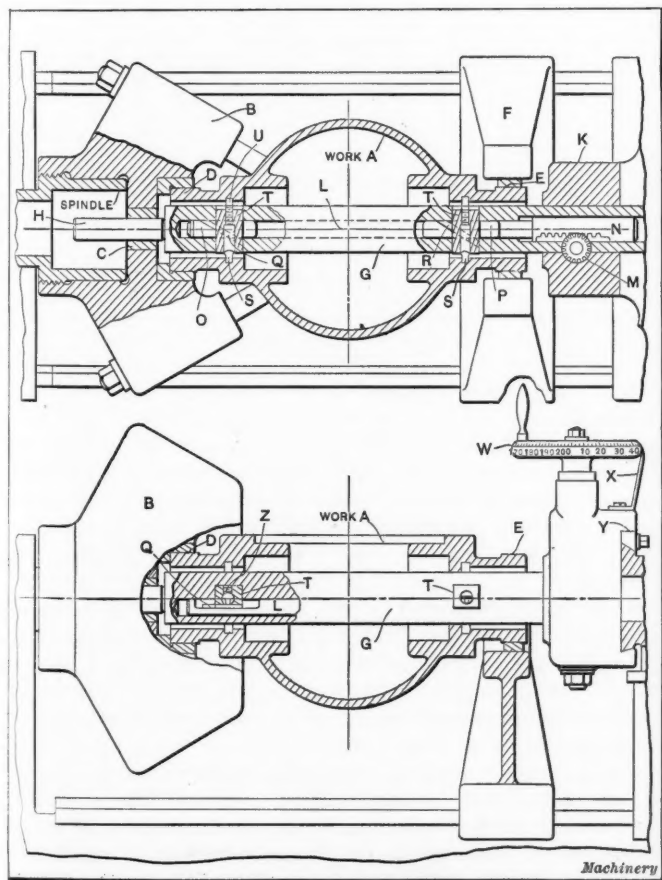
A Double Recessing Tool Arrangement for a Rear Axle Housing
